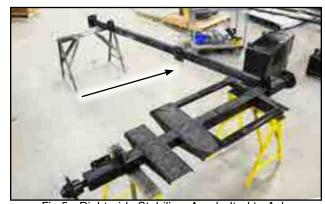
Right-side Stabilizer Arm bolted to Axle
